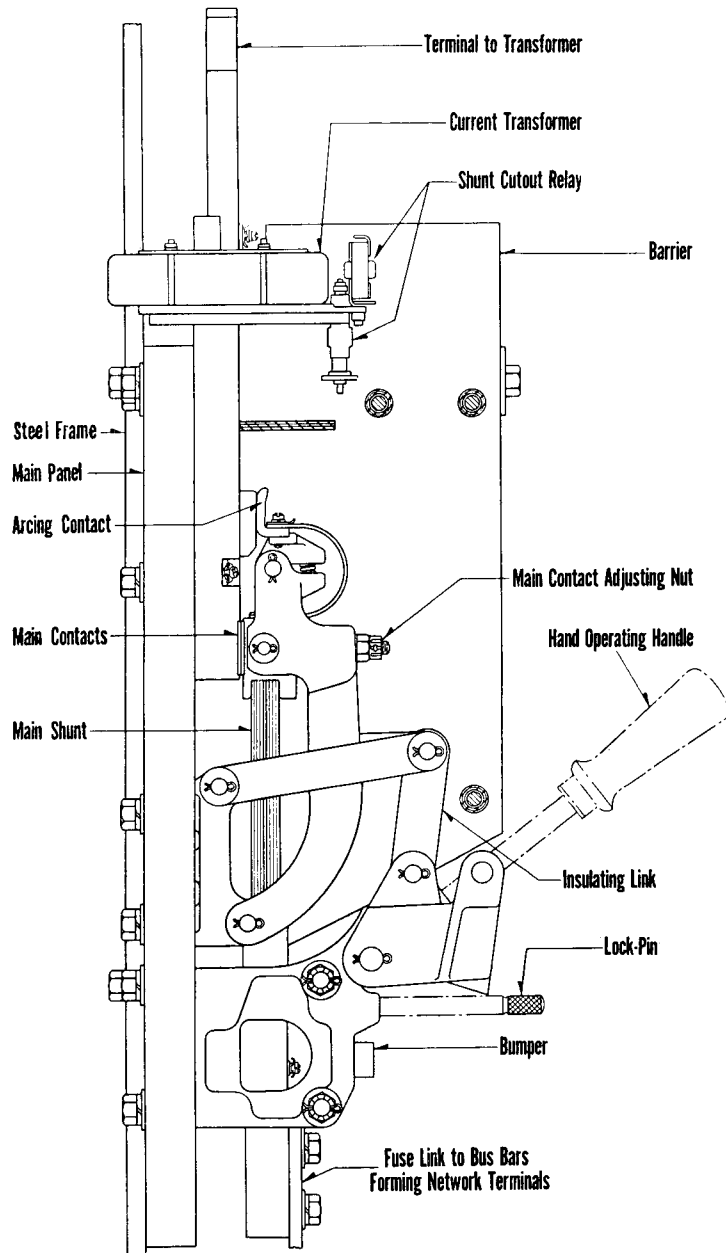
1600 AMPERE CIRCUIT-BREAKER—FOR TRANSFORMER MOUNTED HOUSING—SIDE VIEW
